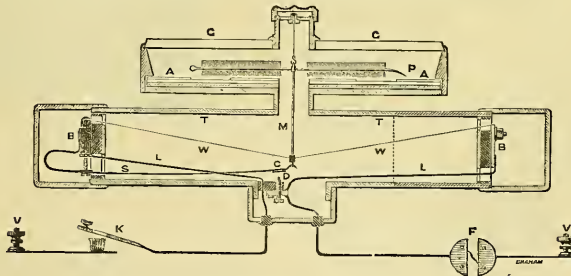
HORIZONTAL SECTION OF HOT-WIRE VOLTMETER.
